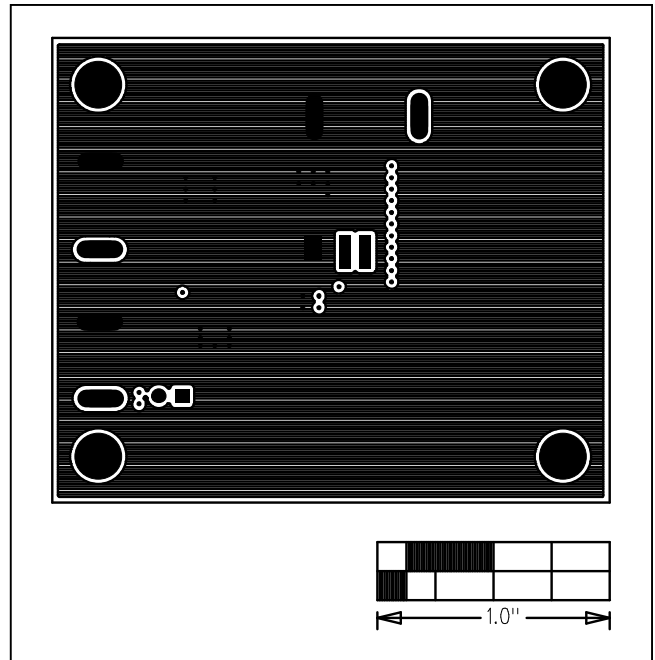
MAXM17514 EV Kit PCB Layout—PGND Layer 3
